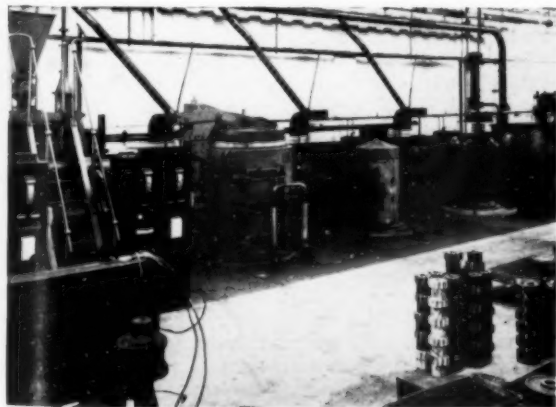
A typical lift-off type of plant by The Incandescent Heat Co., Ltd., for gas carburising heavy gears.
